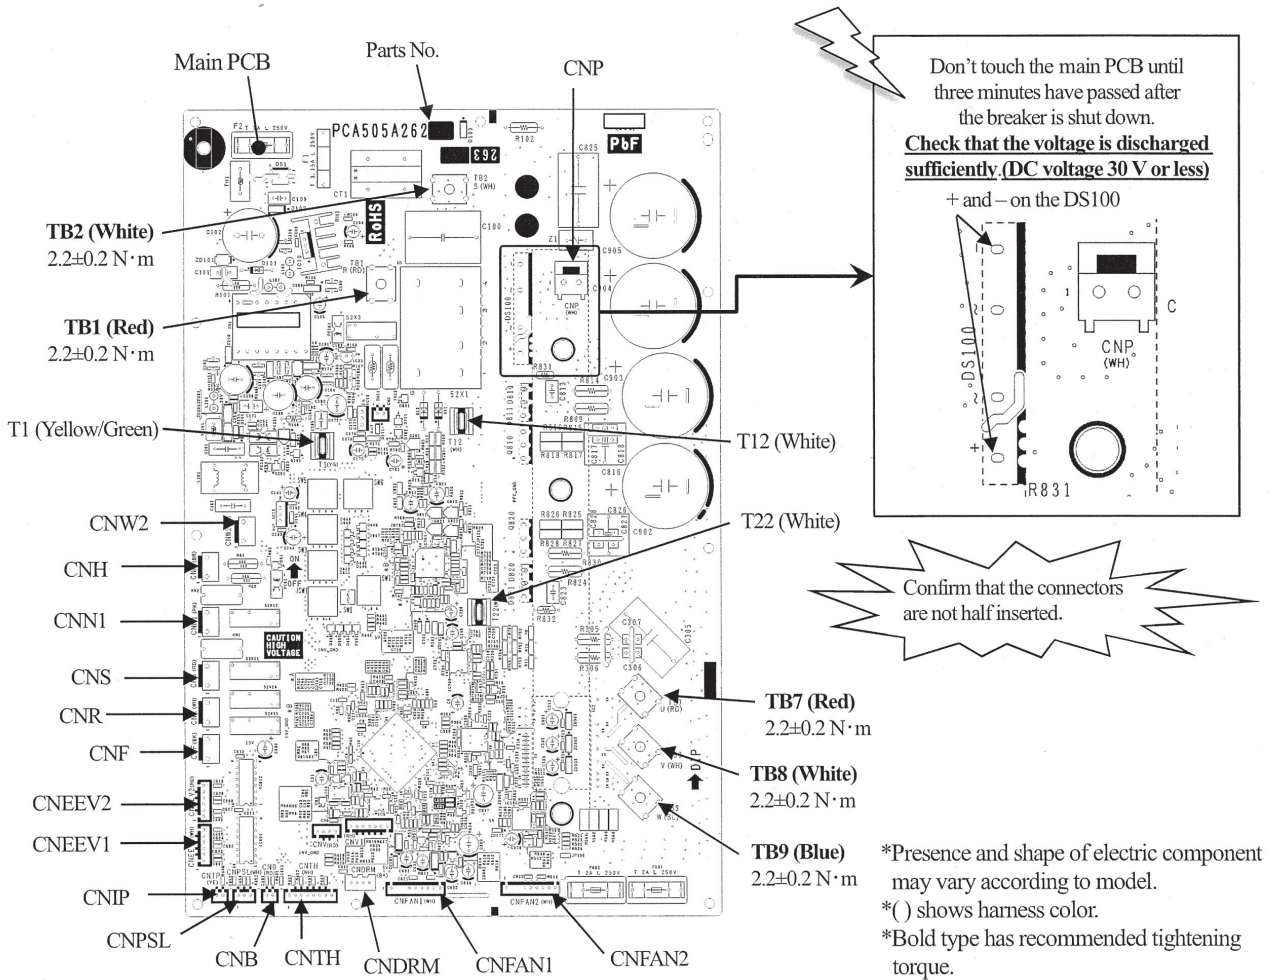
Parts arrangement view of main PCB and voltage measurement points
